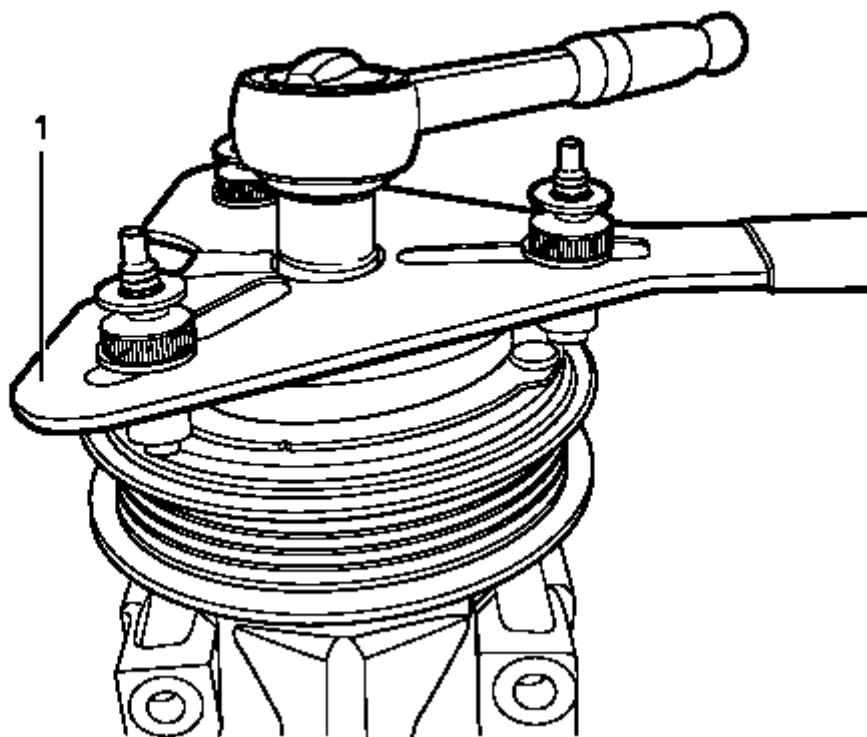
Identifying GE-48965 Clutch Plate Holder
